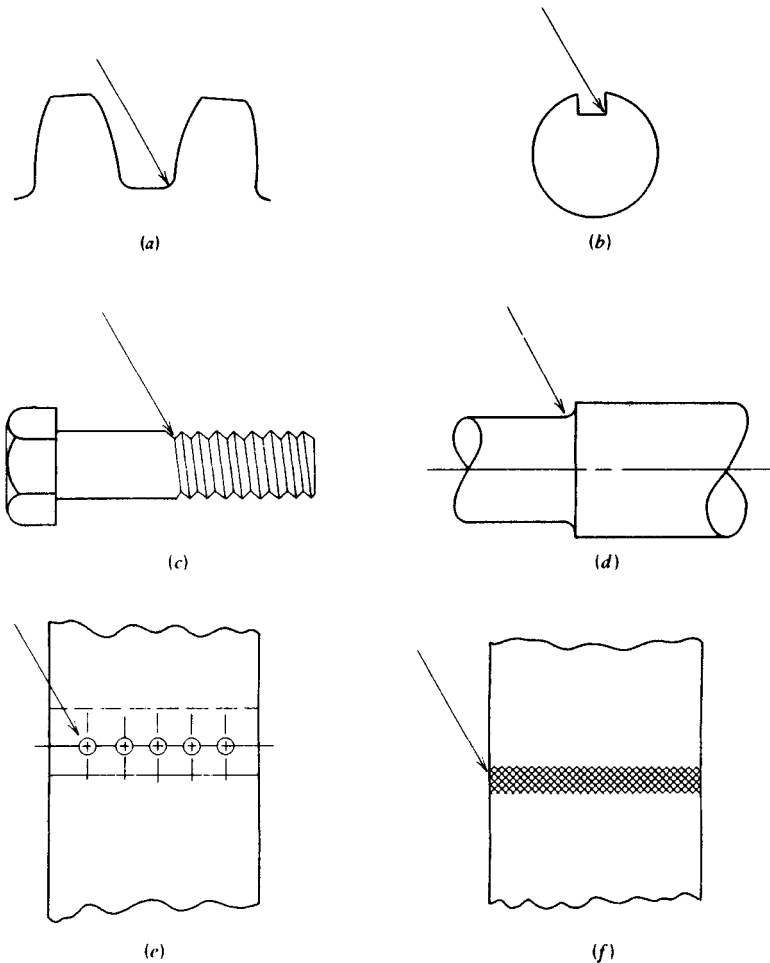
Some common examples of stress concentration: (a) gear teeth; (b) shaft keyway; (c) bolt threads; (d) shaft-shoulder; (e) riveted or bolted joint; (f) welded joint.
